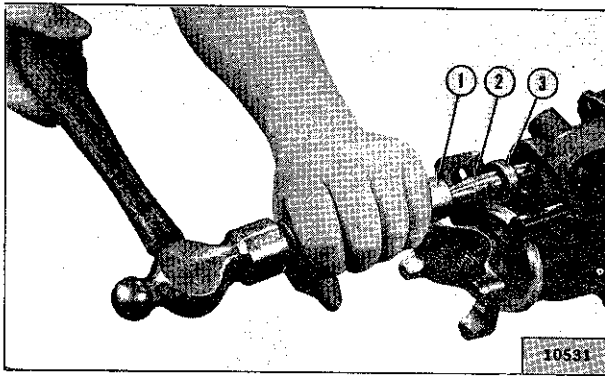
SHIFT ROD OIL SEAL INSTALLER
